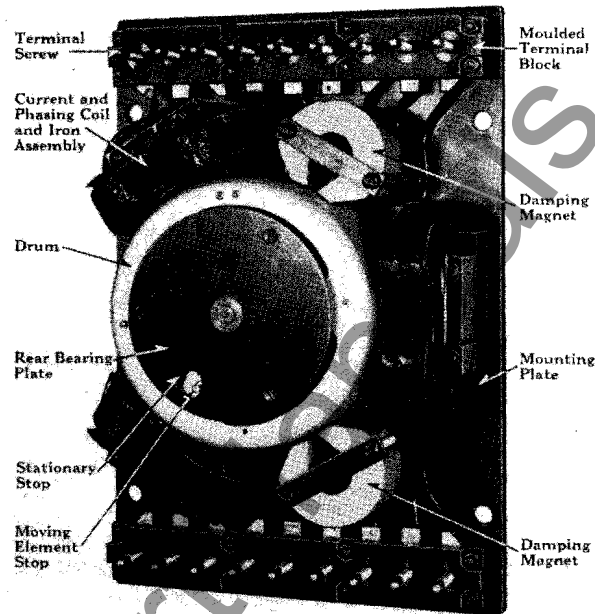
TYPE CN-33 NETWORK MASTER RELAY. REAR VIEW OF RELAY REMOVED FROM BASE.
